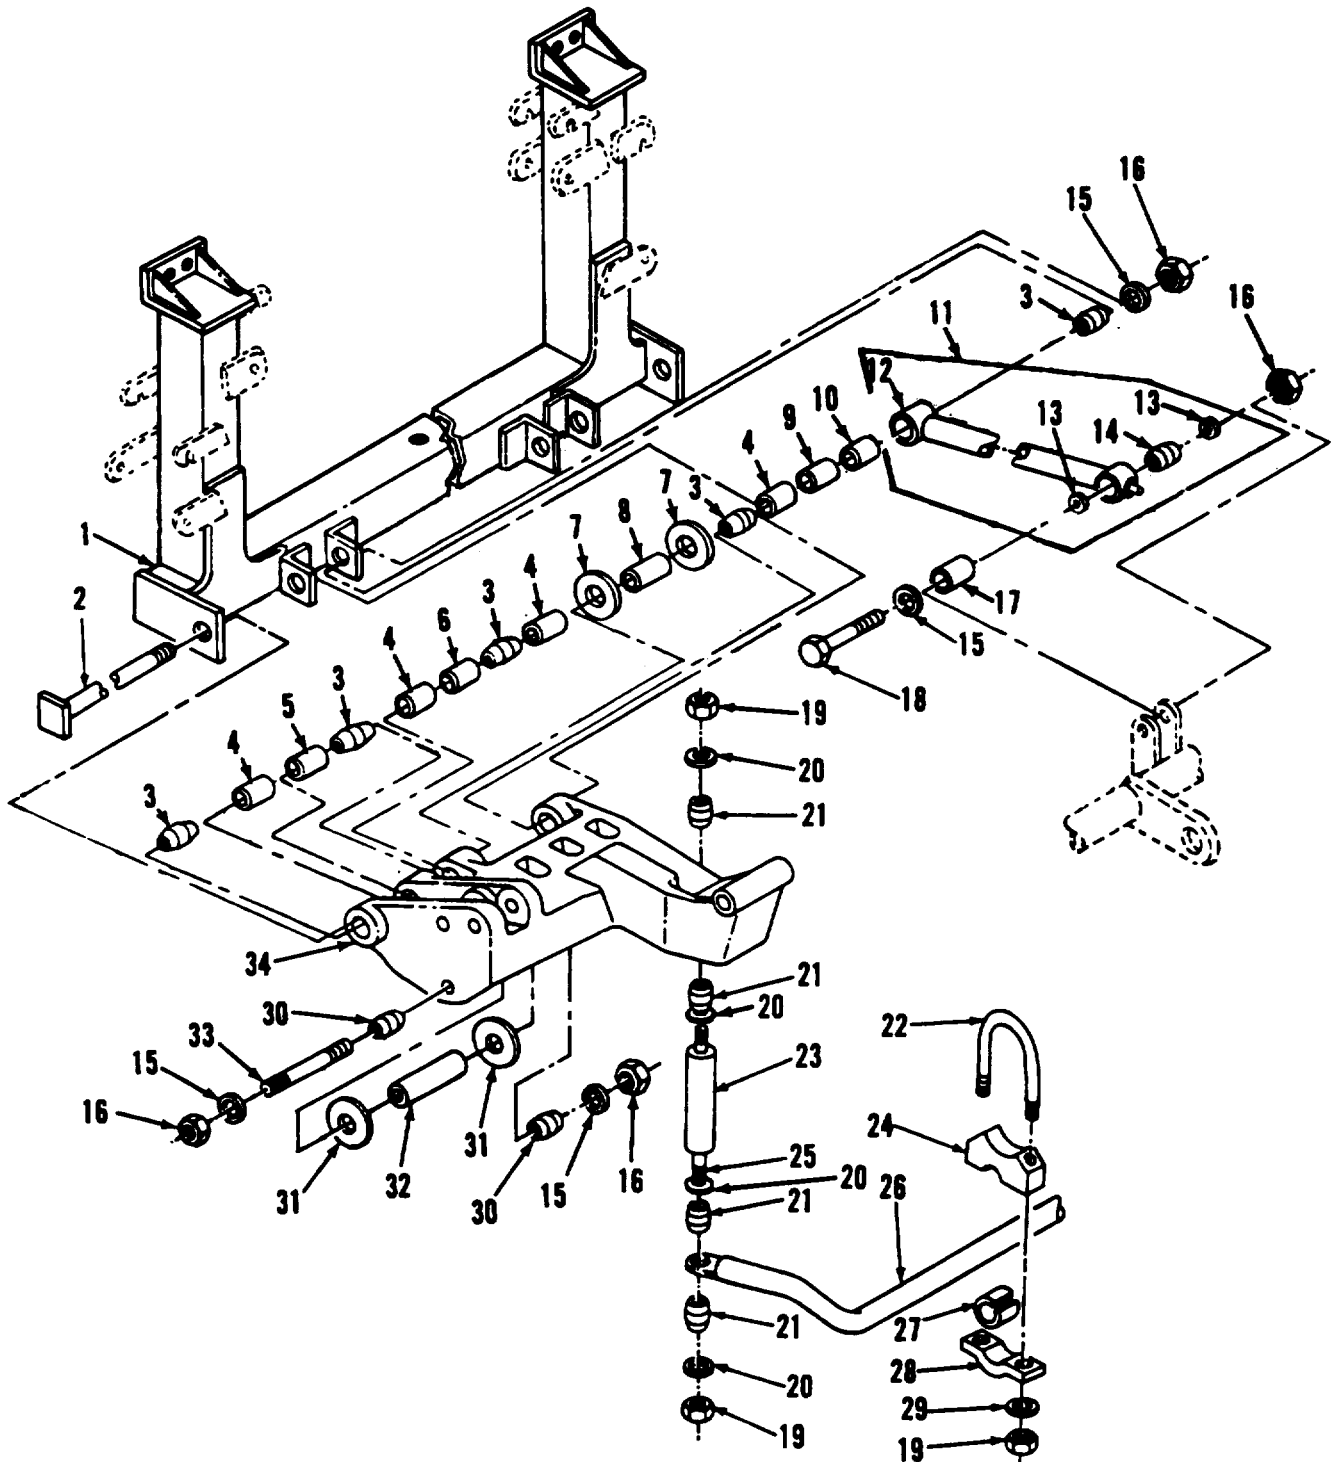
REAR SUSPENSION BAR AND RELATED PARTS (M832) (SHEET 1 OF 2).
